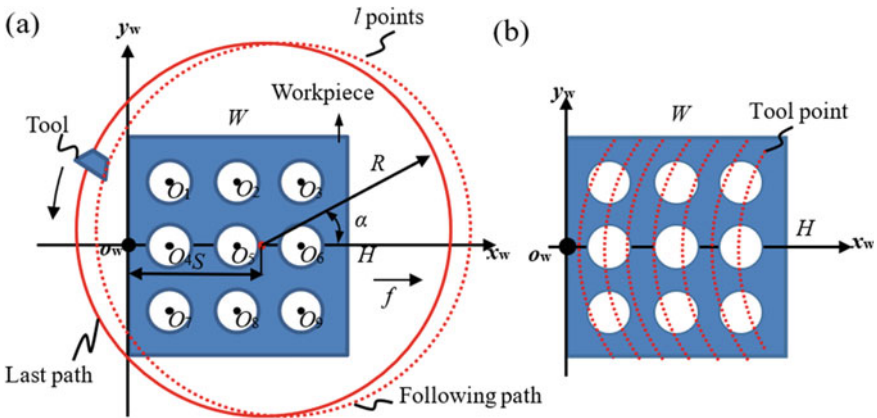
Schematics of a tool rotation and feed, and b tool path covering the lens array
